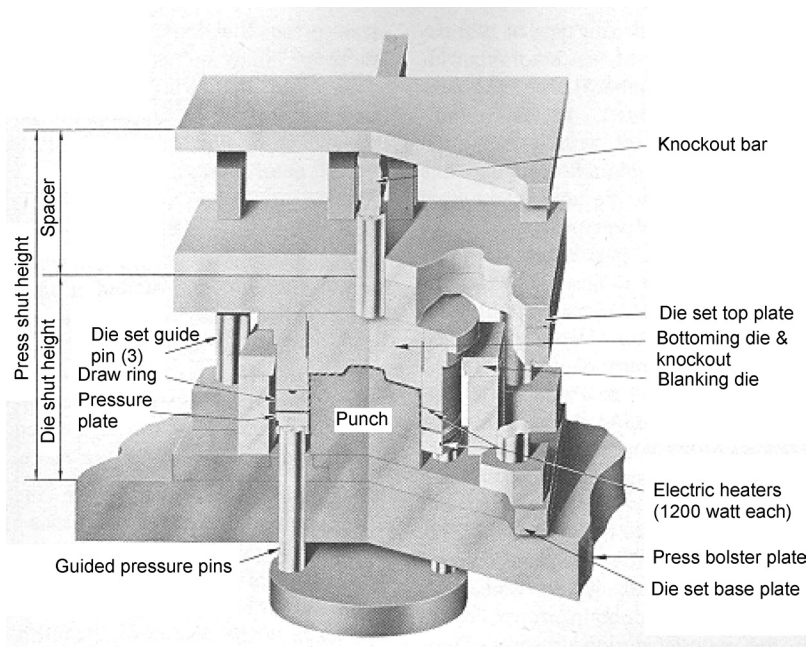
Tooling design for warm forming in a mechanical press using electric heating elements. Source: Ref 5.13
